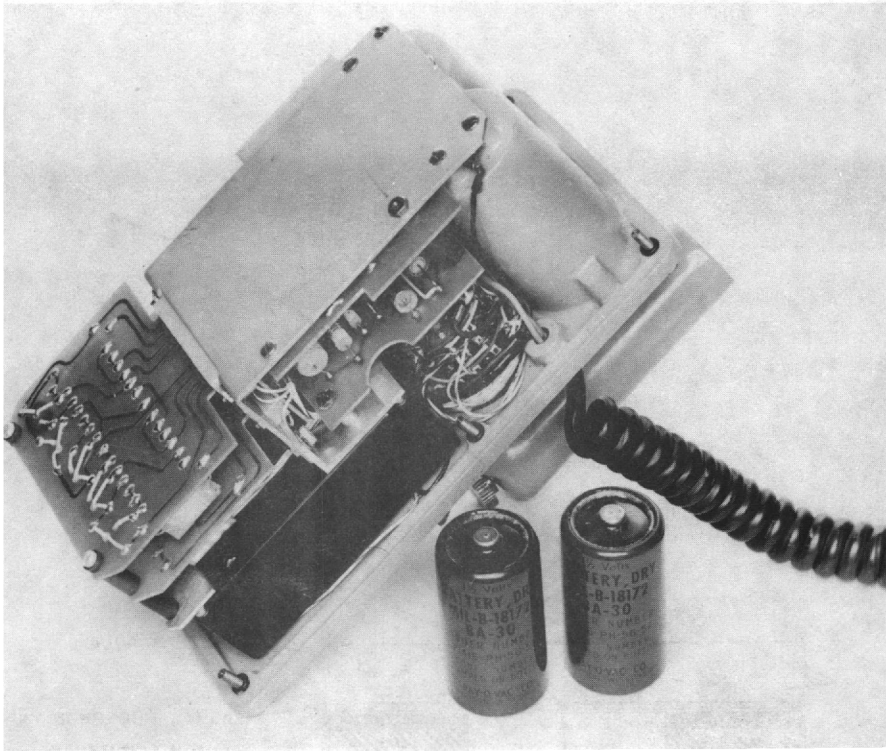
Electronics Assembly of Main Instrument Housing, Showing Plug-in Printed Wiring Boards
